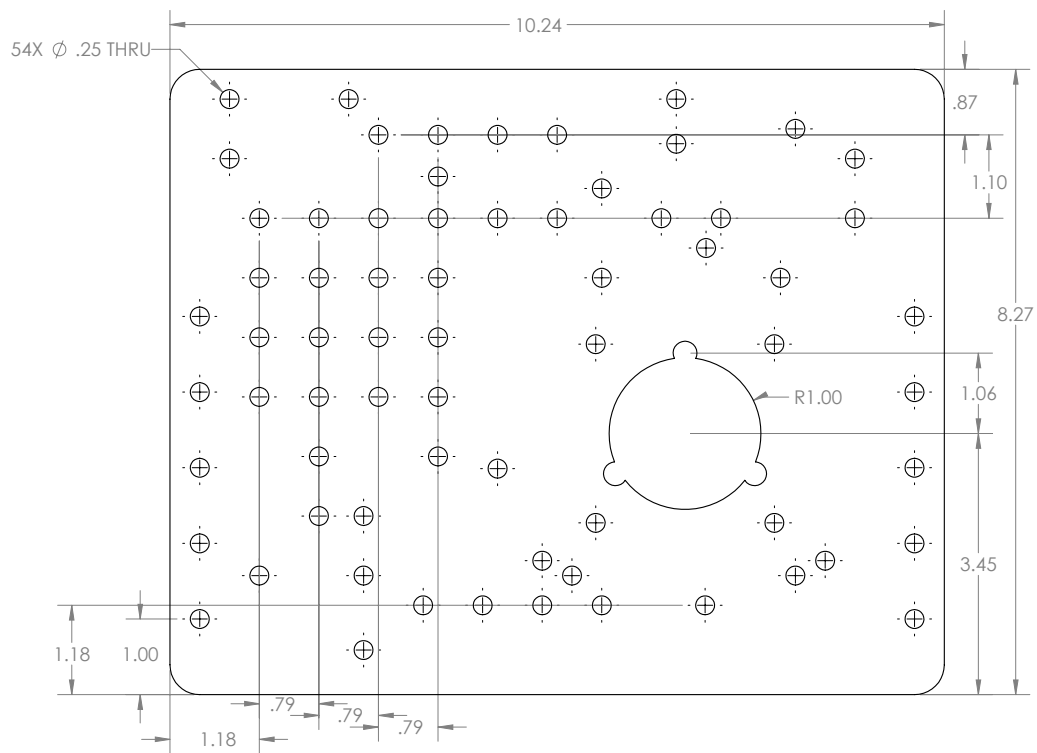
Mechanical drawing of the custom-machined vertical breadboard. Not all dimensions are shown.
